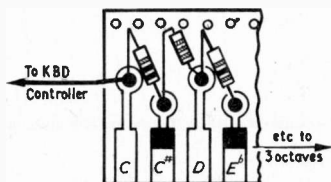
(a). Wiring of the edge connector strip as used on the prototype. Resistors are wired in from the conductor side of the board. Excess wire on the other side of the p.c.b. should be trimmed off and filed flush so that the board may be glued to the front panel
